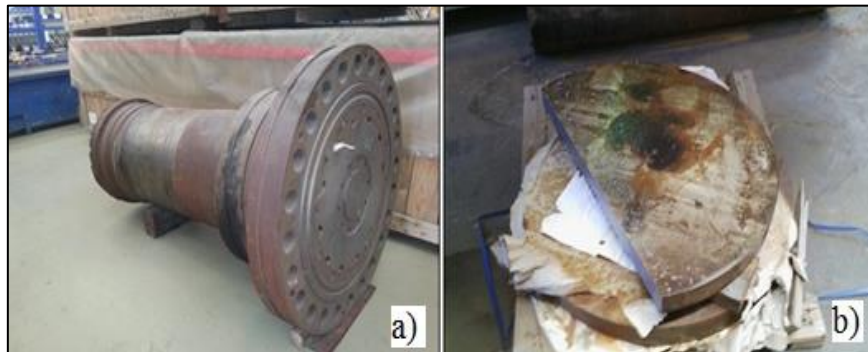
NiCrMoV rotor steel showing: a) rotor stub and b) sliced rotor.
